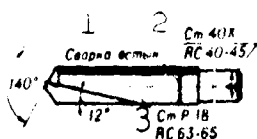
Drill with oblique flutes for drilling shallow holes in tungsten alloys. 1) Butt weld; 2) 40 Kh steel; 3) R18 steel.
